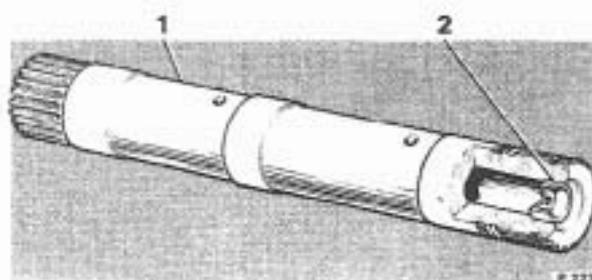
MAINSHAFT AND PLUG ASSEMBLY
